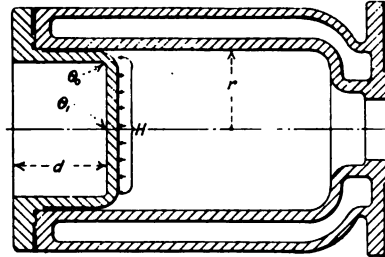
VAPORIZER CAP PROJECTING INWARDS
